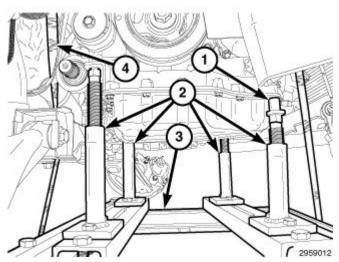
Adapter, Engine Support Cradle, Power Train Dolly & Safety Straps Courtesy of CHRYSLER GROUP, LLC
